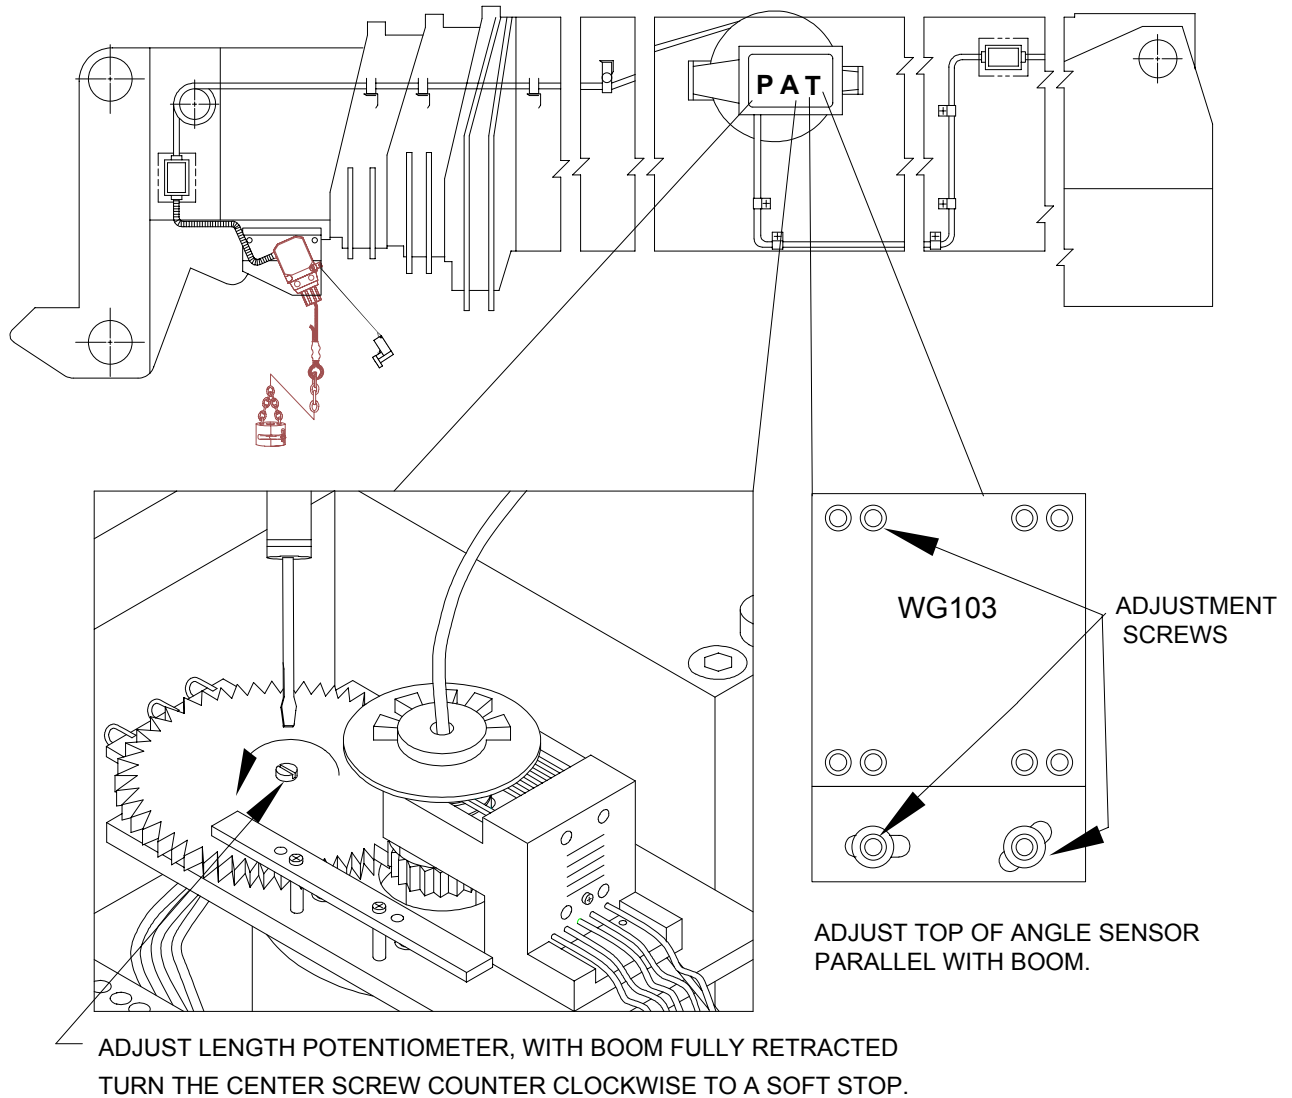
Hydraulic Boom Length and Angle Adjustments.
